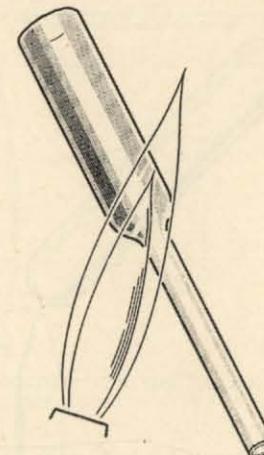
HEATING TUBE BEFORE BLOWING TO PRODUCE WELL-SHAPED END
